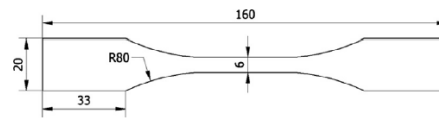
Geometry of base material tensile specimens 6 mm thick (dimensions in mm).
